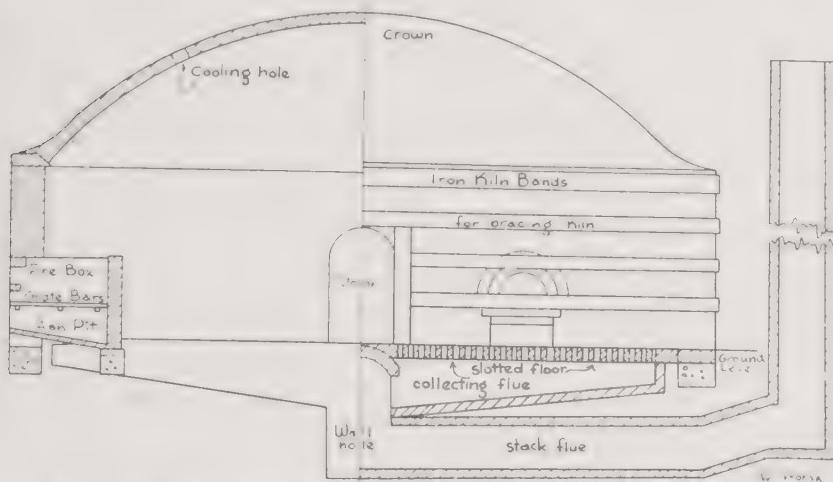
The round down-draft kiln, suitable for firing heavy clay products. (See text.)
